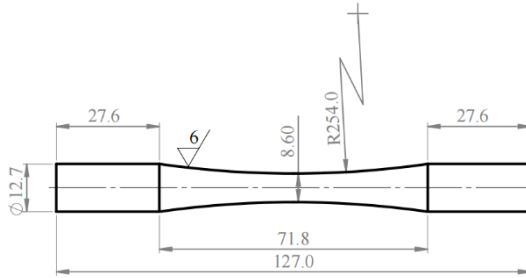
Standard fatigue test specimens with a radius of 254 mm
